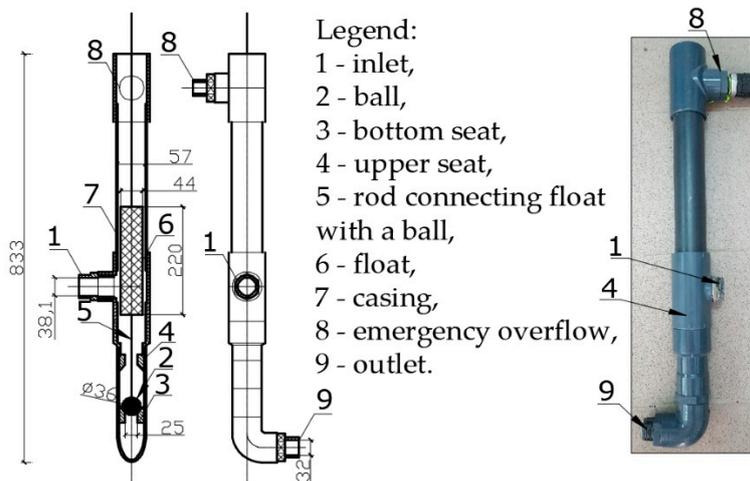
Vertical section and side view of the check valve at the ST outlet.
